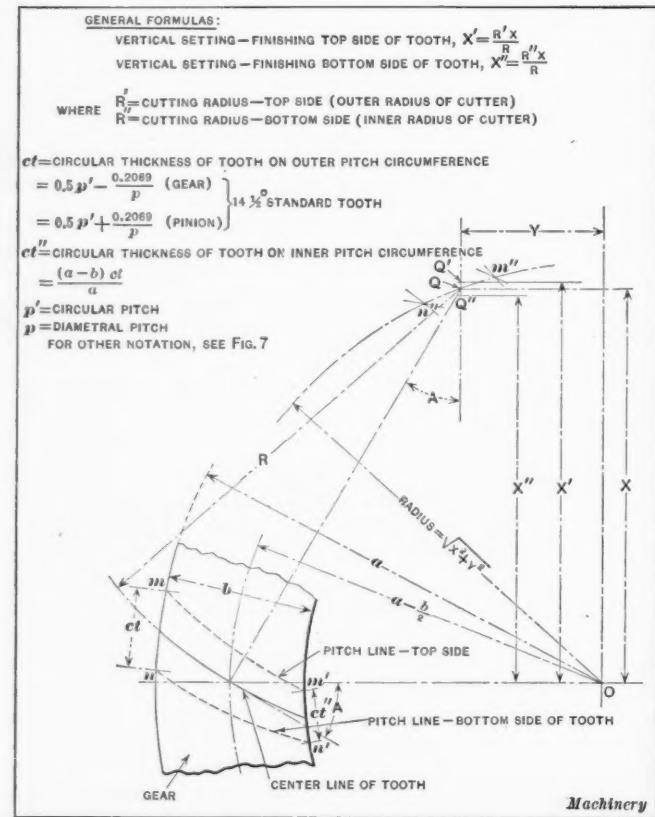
Vertical Settings for Finishing Cutter for Right-hand Spiral Gear
